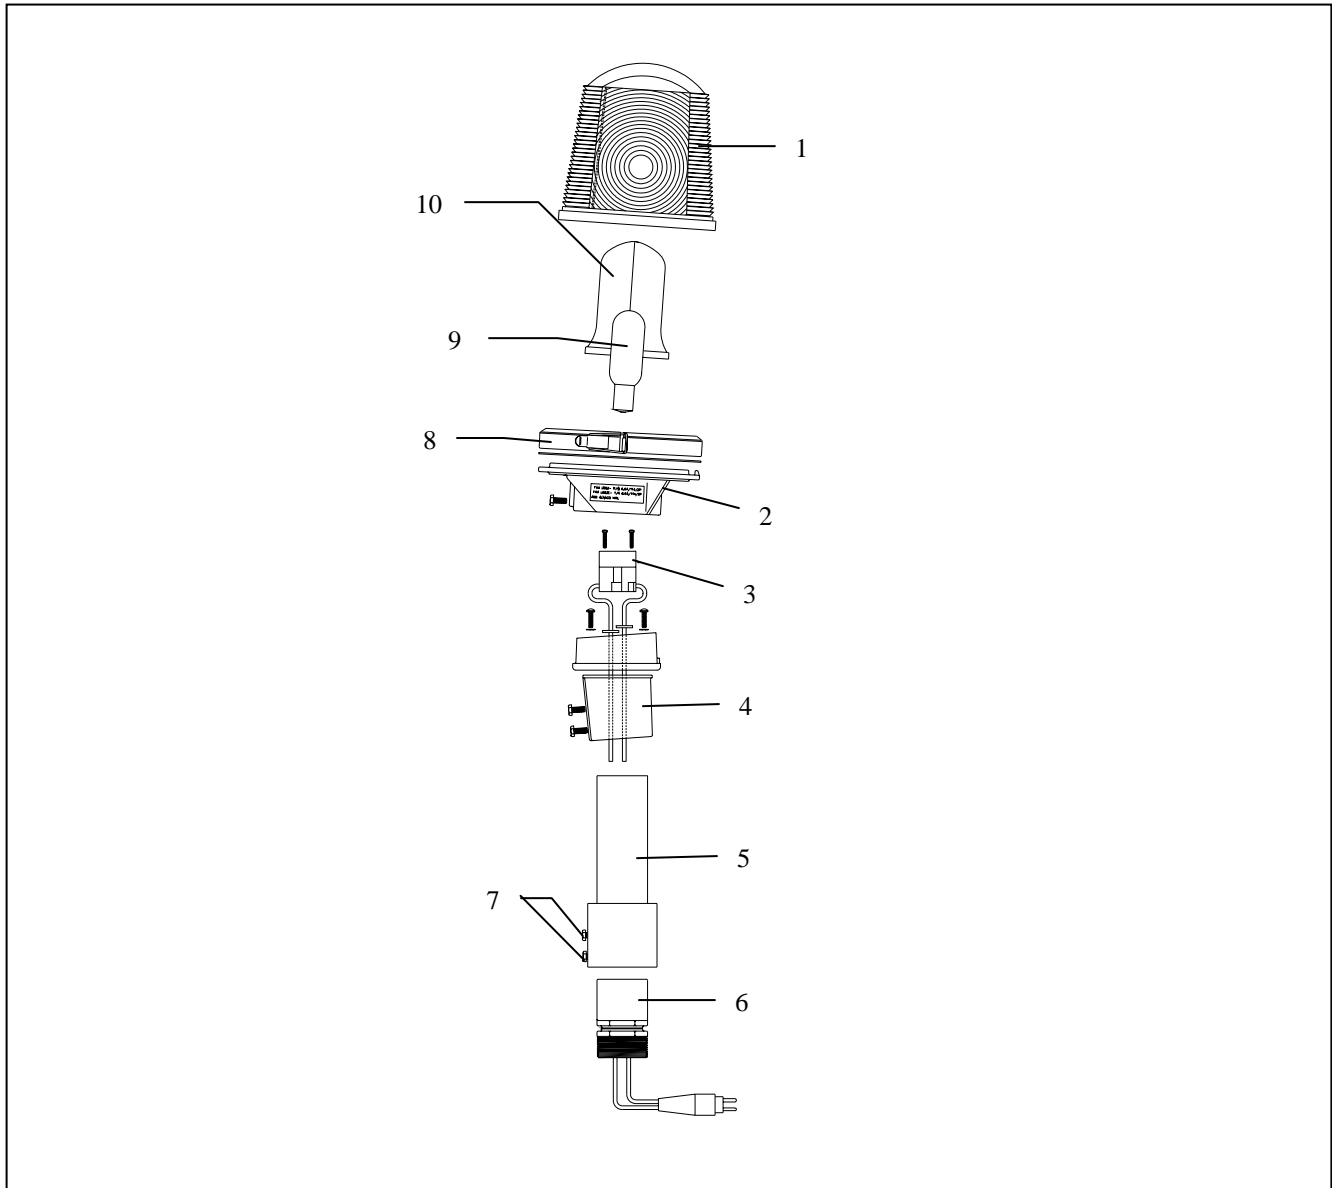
L-862 Elevated Runway Edge Light Assembly with Extension
